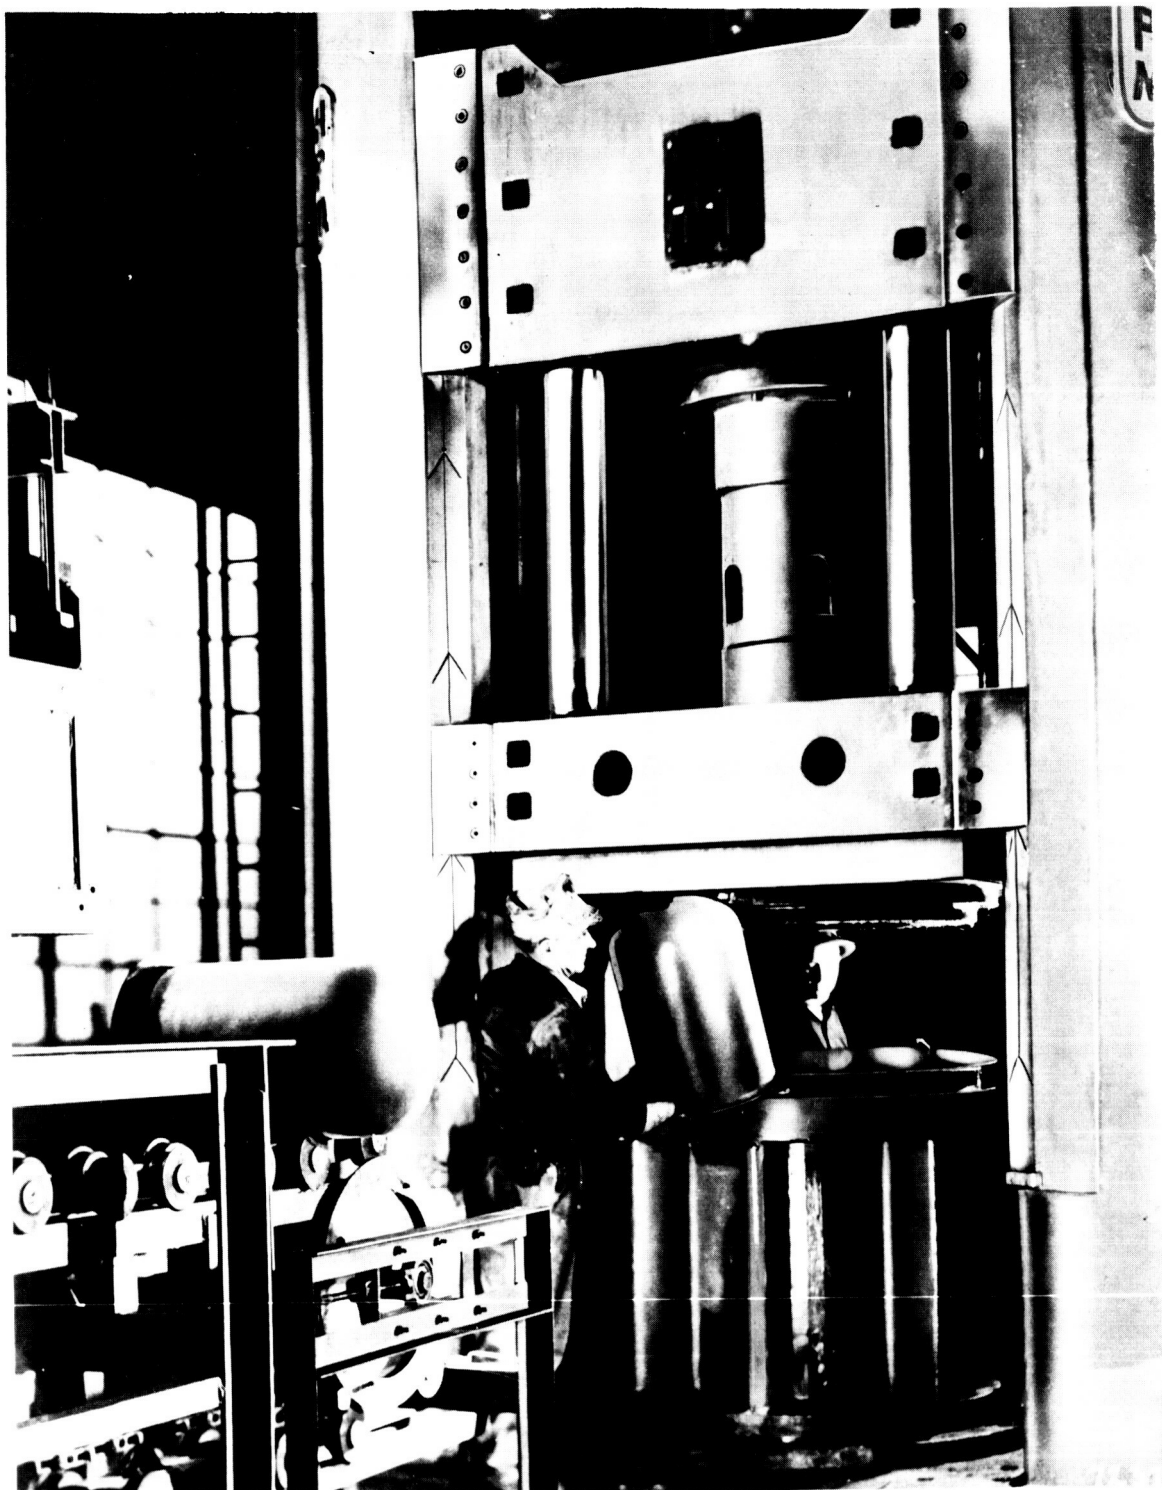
TRIPLE-ACTION HYDRAULIC PRESS FOR DEEP DRAWING 750-TON CUPPING AND REVERSE DRAW IN ONE OPERATION (REF. 64)
